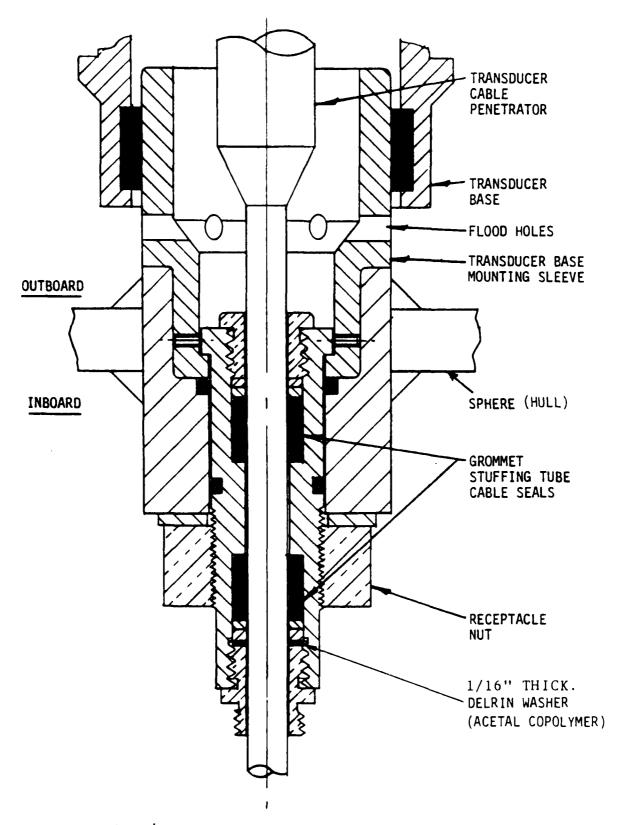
$T\dot{R}$ -155 transducer cable stuffing tube hull penetrator.
